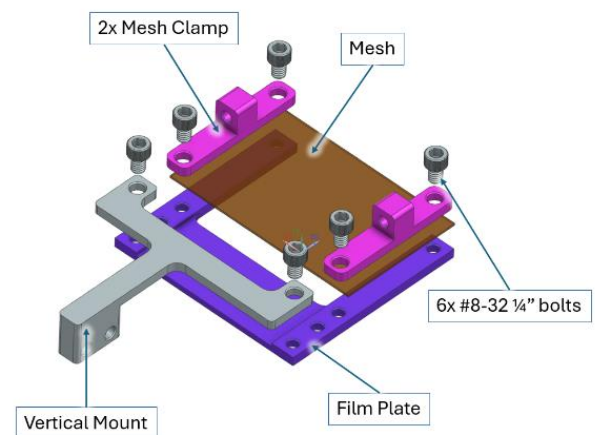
Assembly of Mount and Mesh using Mesh Clamps
